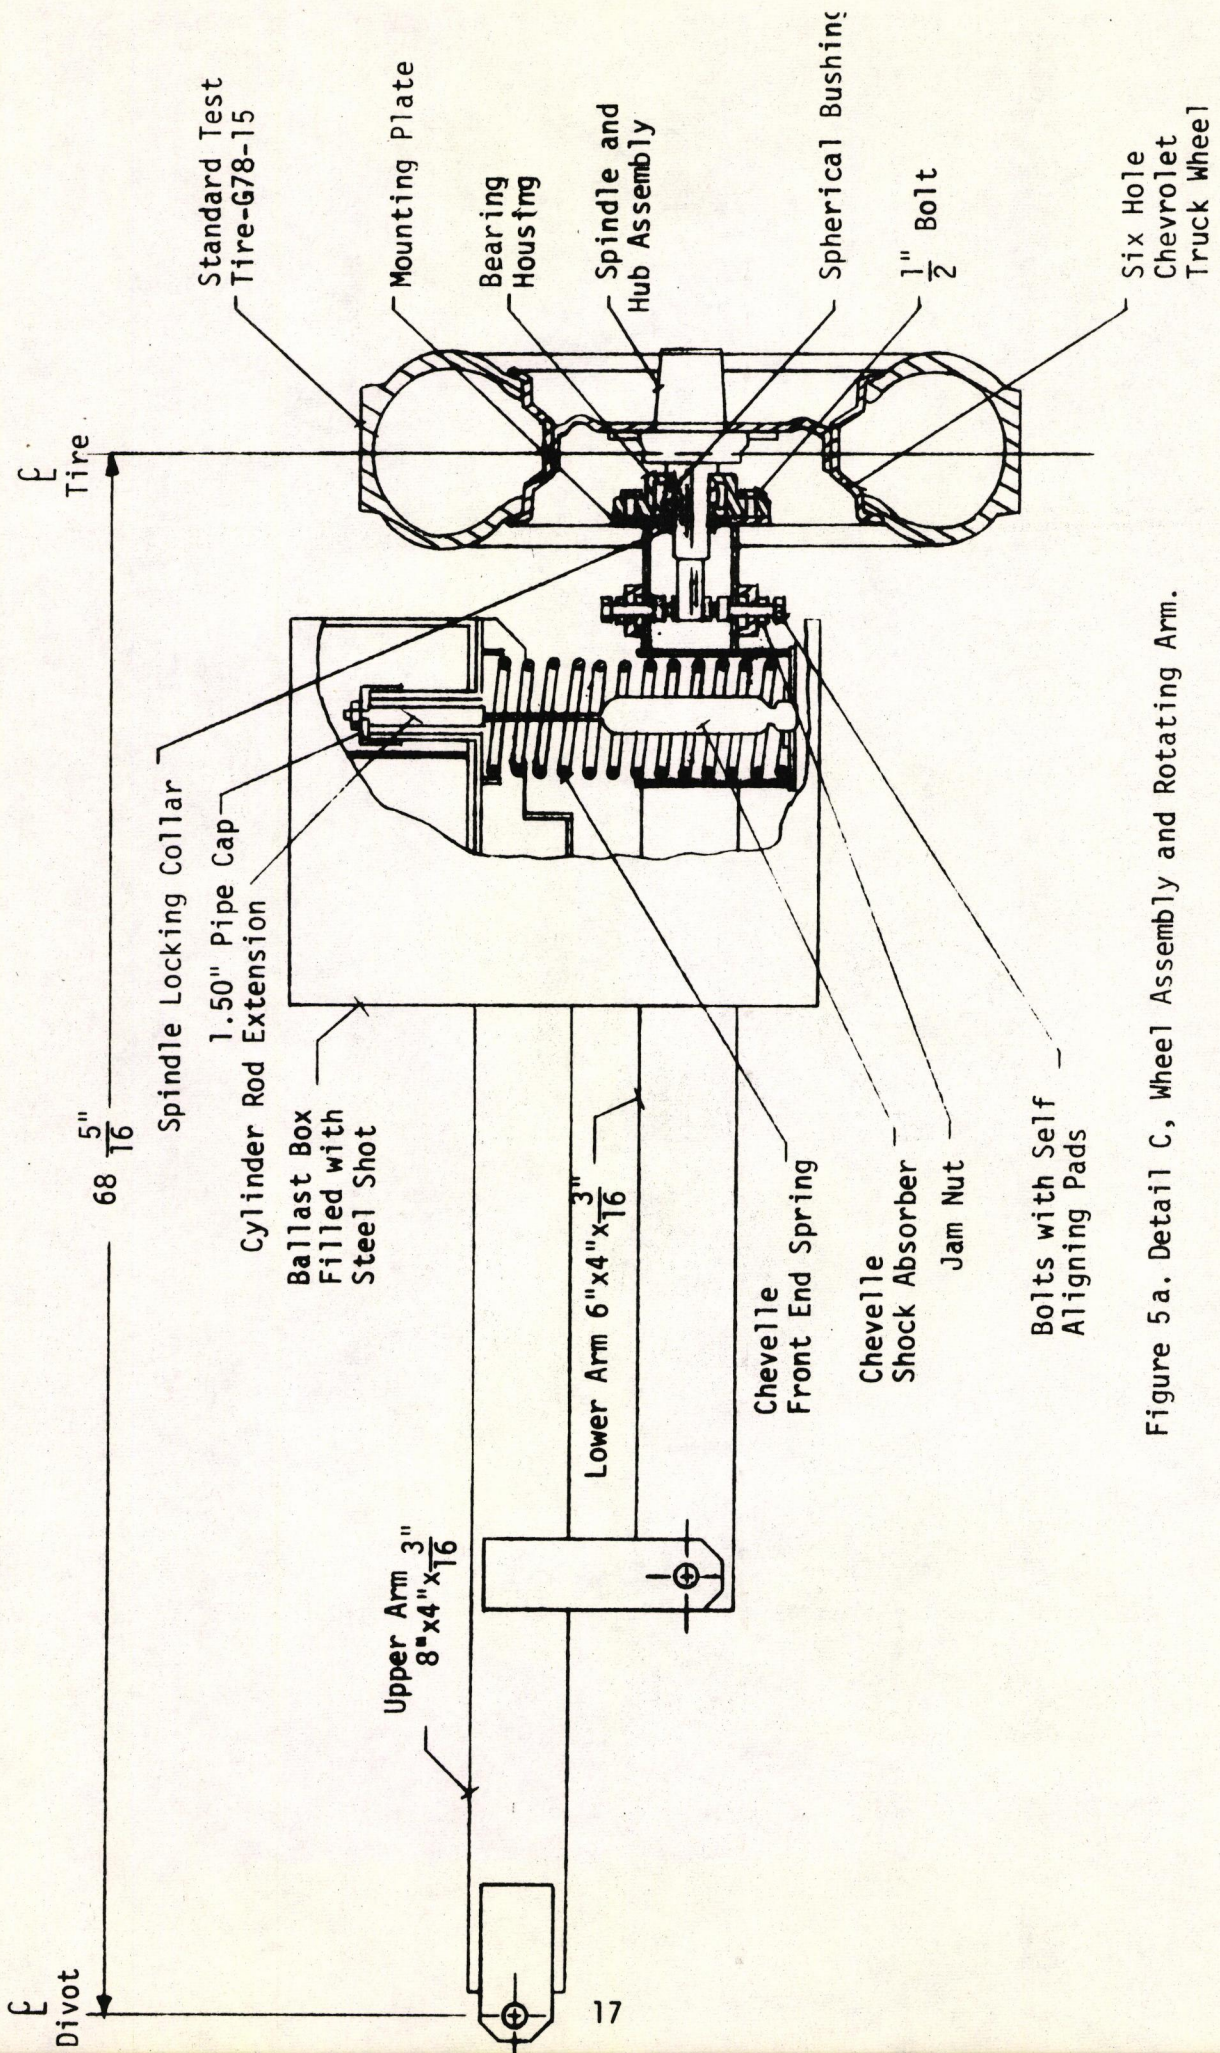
Detail C, Wheel Assembly and Rotating Arm.
